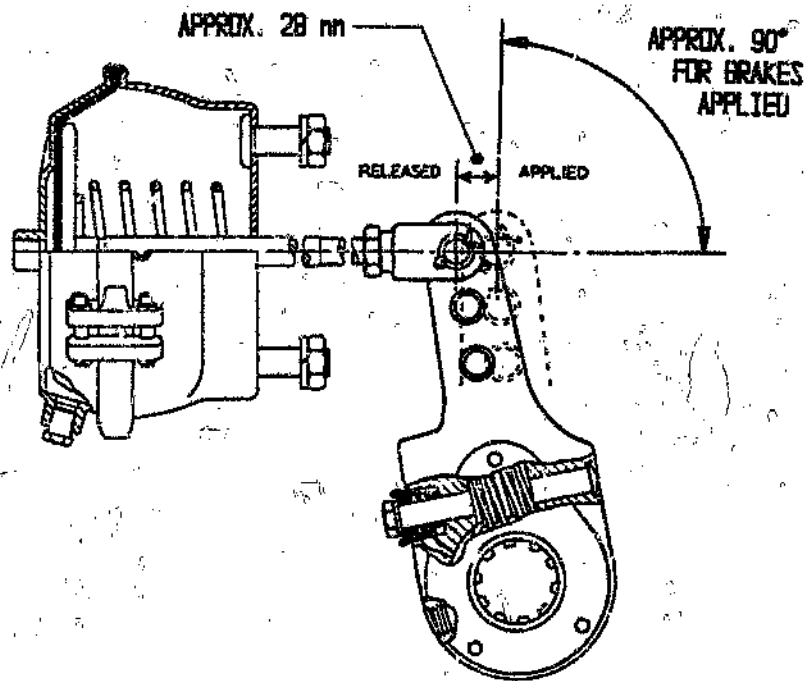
The correct brake chamber push-rod length and slack adjuster position for the brakes fully released
